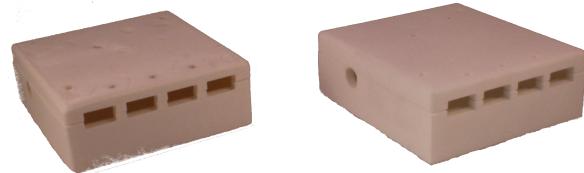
Packaging Printed on MakerBot (left) and by Shapeways (right)
